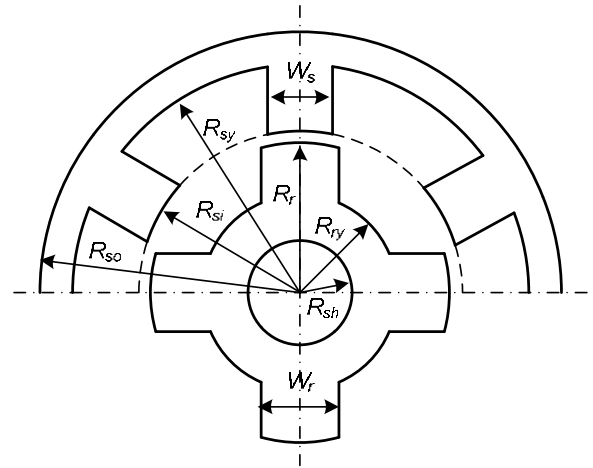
Dimensions of stator and rotor cores of 6/4 VR stepping motor.
